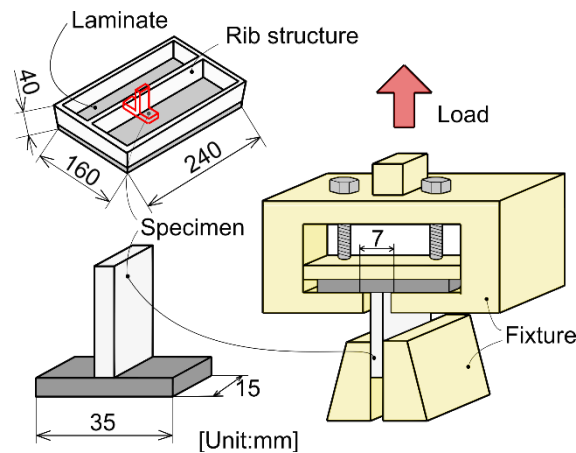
Schematic drawing of T shape specimen and tensile test at rib roots.
